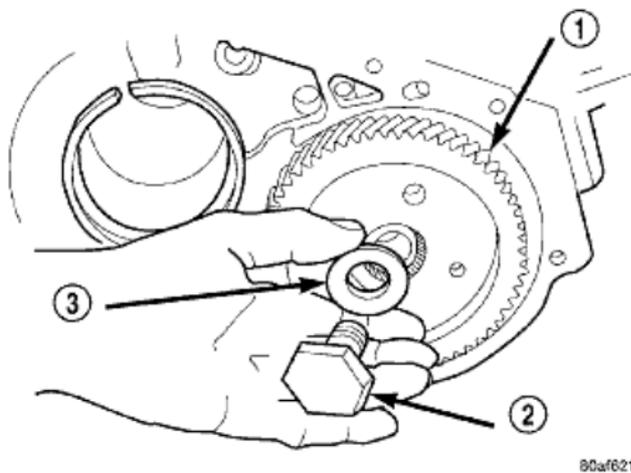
Removing/Installing Output Gear Bolt & Washer
